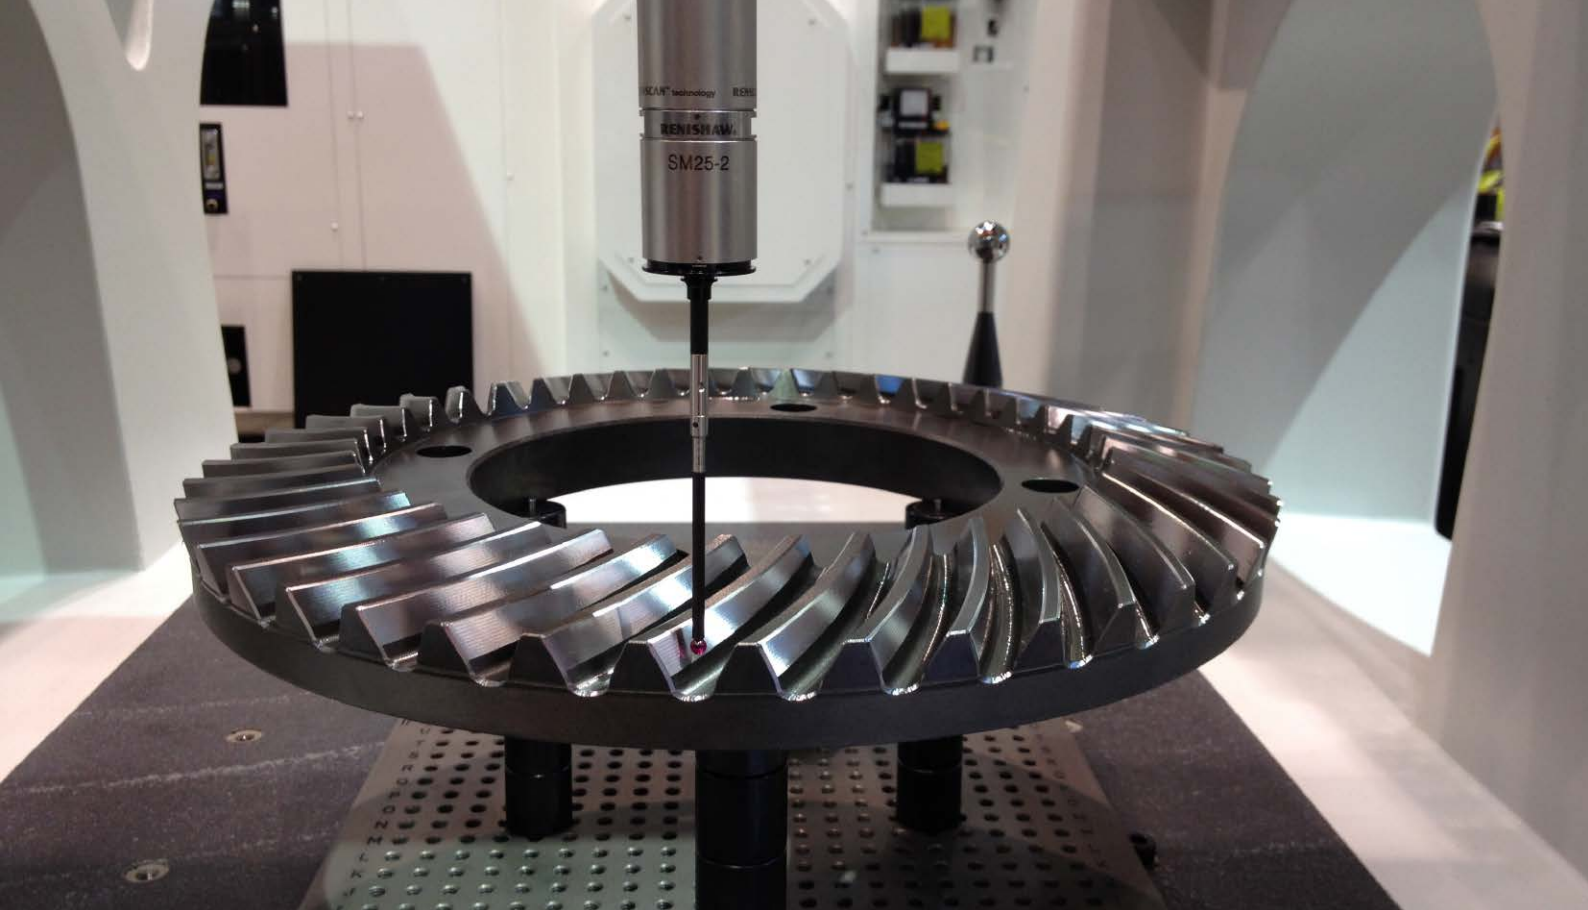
Surface Data Collection of Hardened Spiral Bevel Tooth Flanks on CMM
